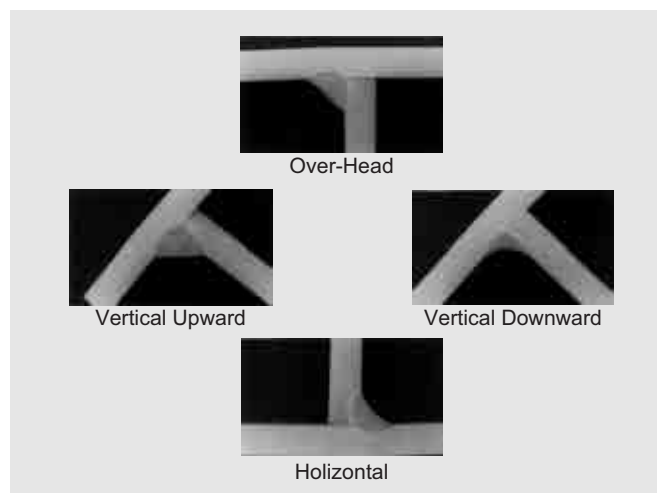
Cross-section of macrostructure of DW-308LP fillet weld (304L base plate of 3 mm thick)
